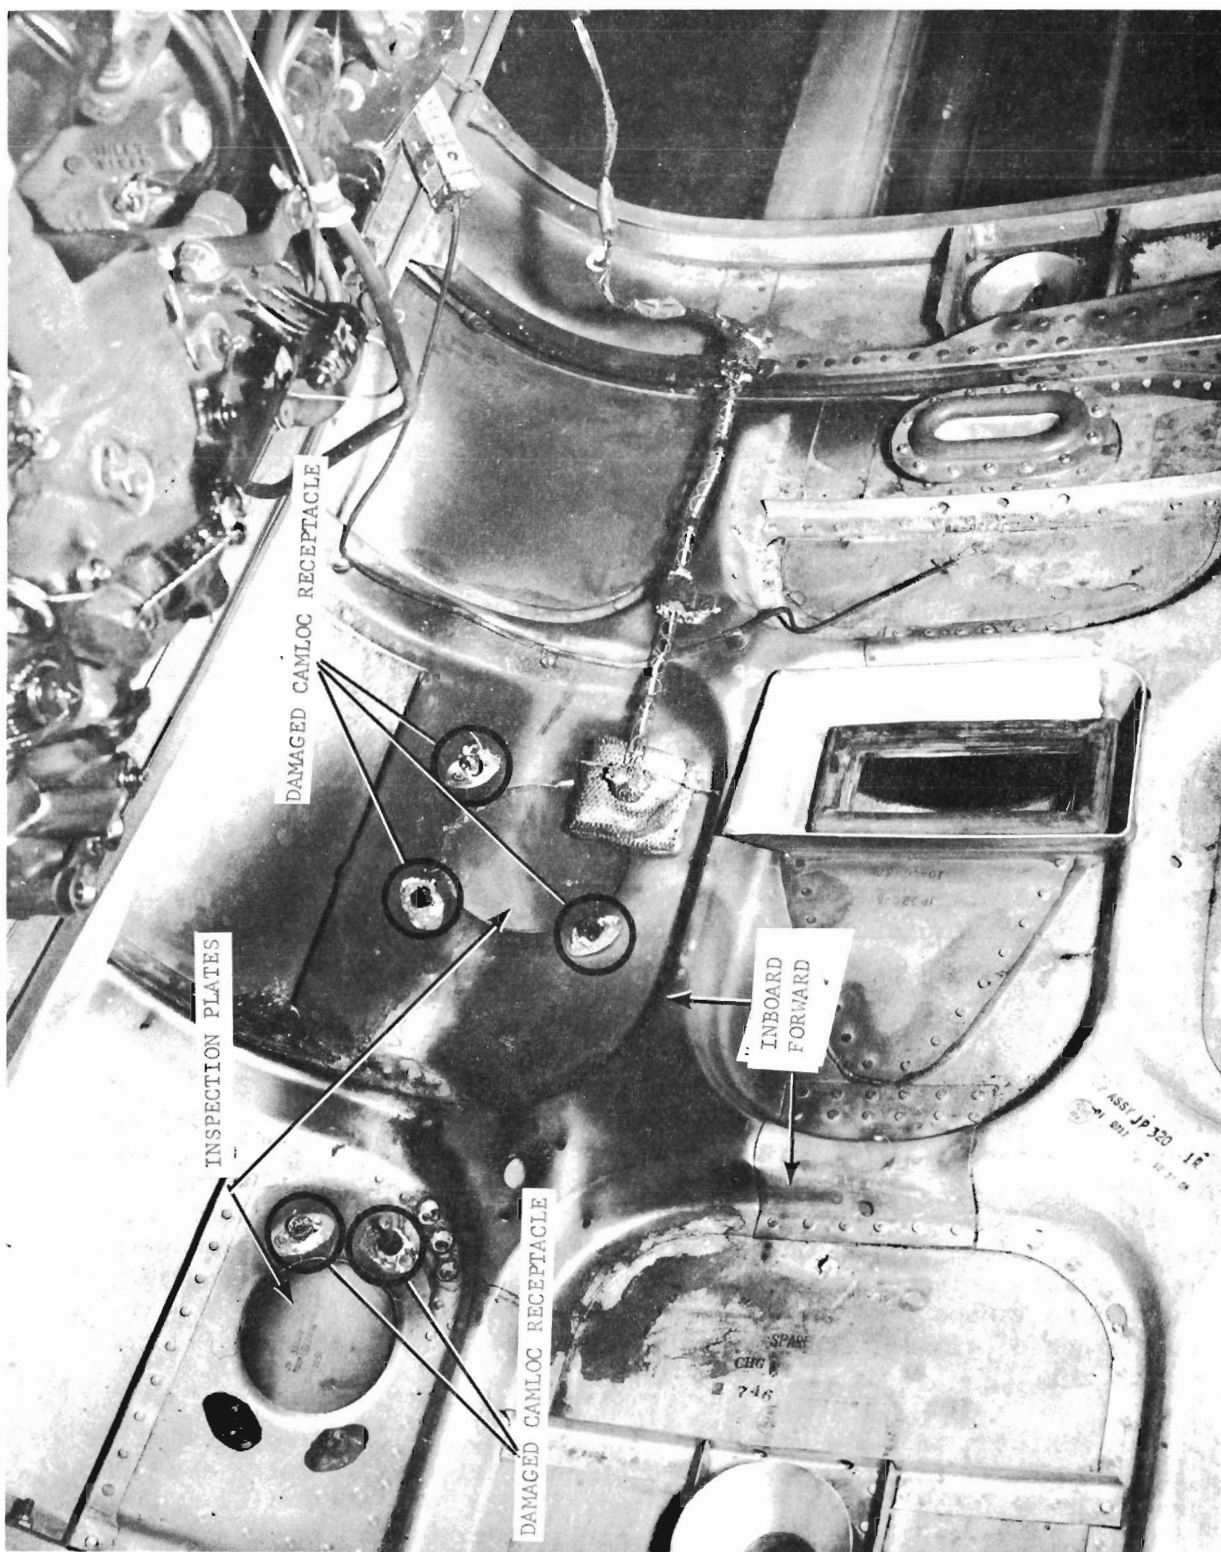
DAMAGE TO SMALL INSPECTION PLATE
